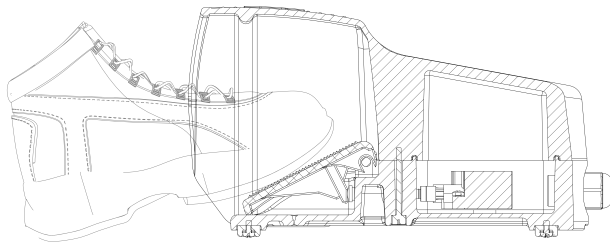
(Foot Positioning): The shoe or safety boot must be fully inserted into the protective housing.
